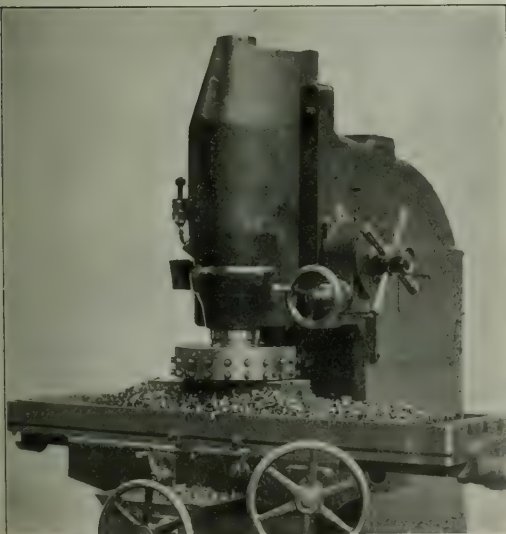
Vertical Milling Machine Removing 10 cu. in. of Steel Per Minute.
